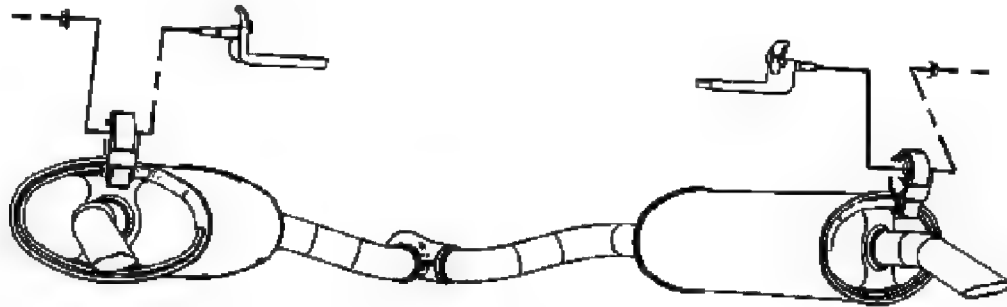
Identifying Rear Exhaust System Hanger Bracket Nuts
